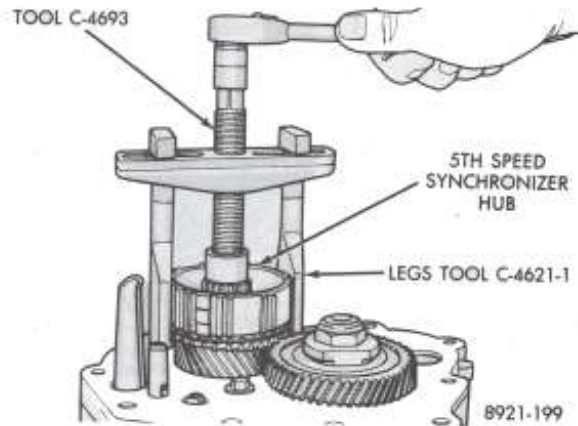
Remove 5th Speed Gear and Synchronizer with Struts
